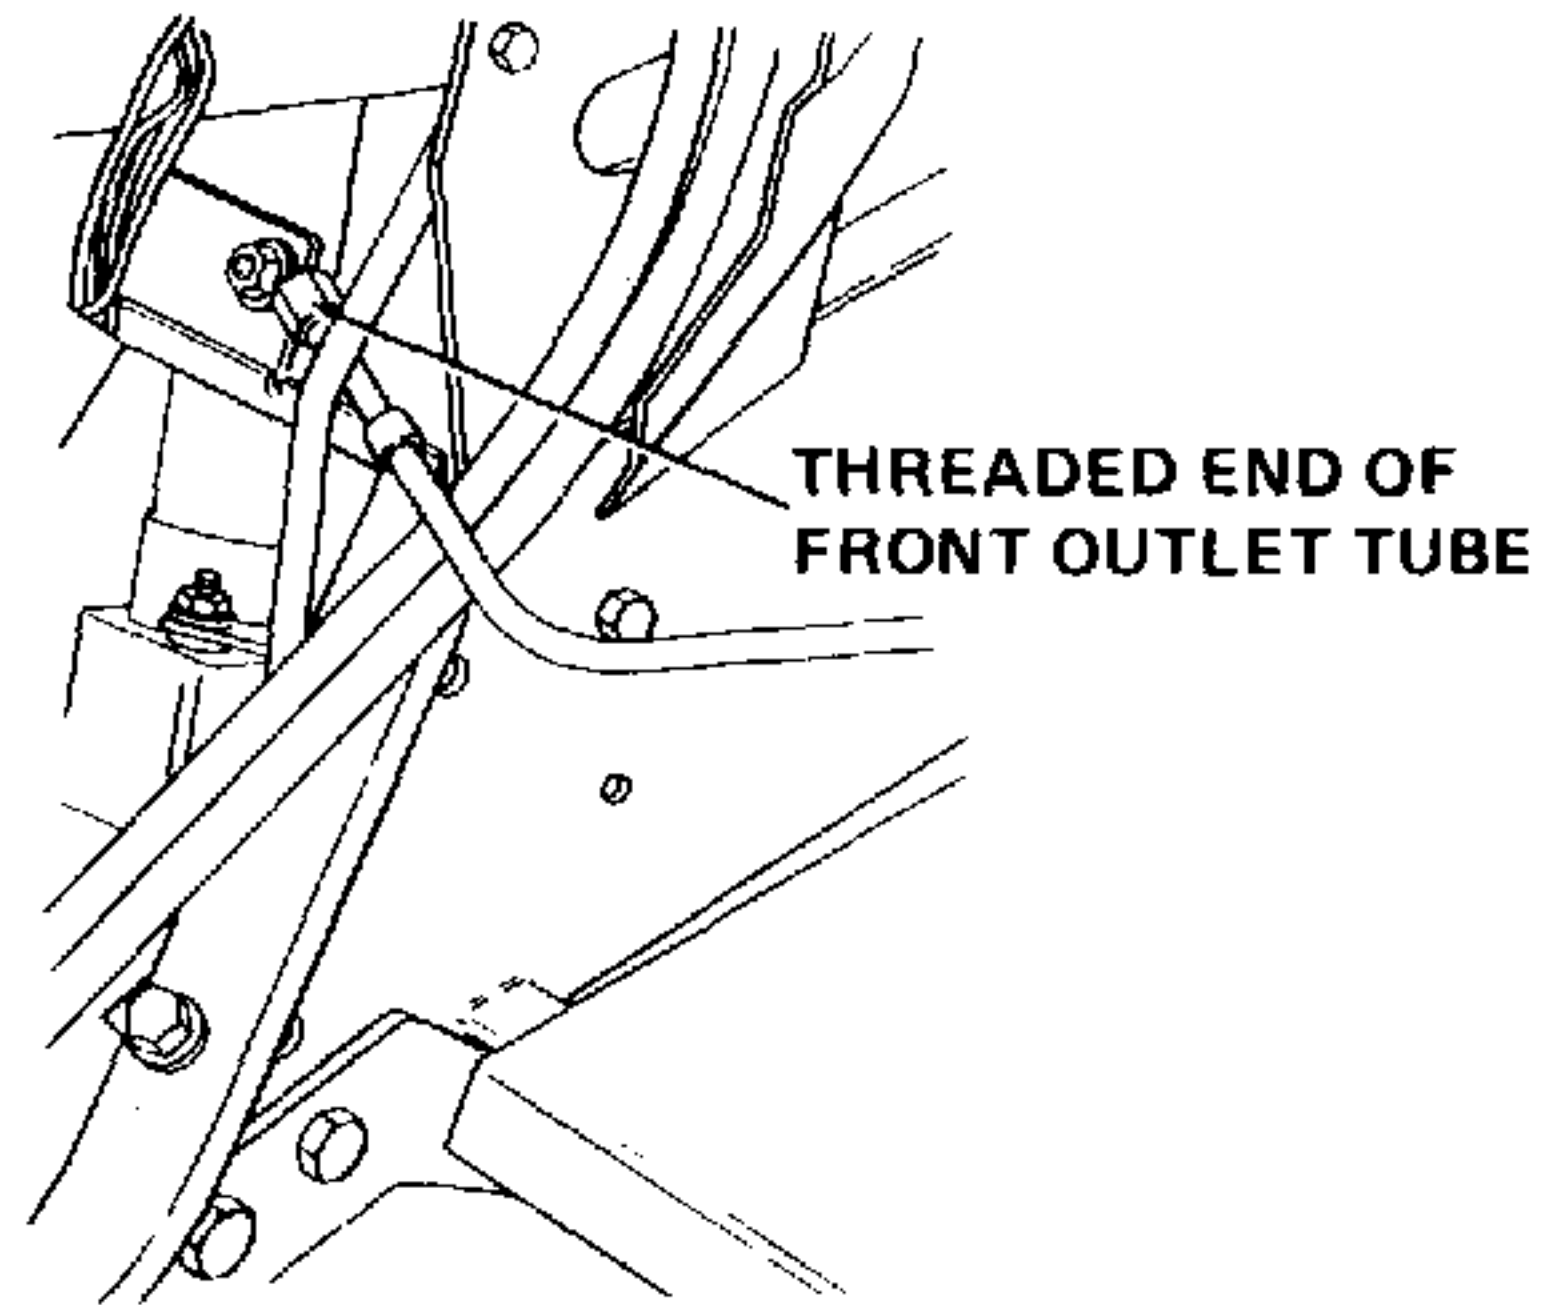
Placement of Front Outlet Tube (Models 1541, 1862, 1882 and 2082 Only).
